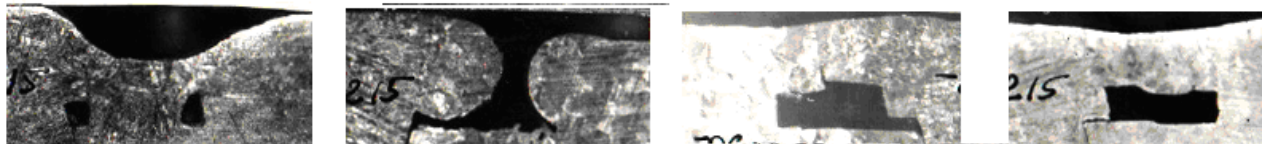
Macro sections of the weld zone with excess edges, mm: a – 1.4; b – 1.2; c – 0.8; d – 0.25
